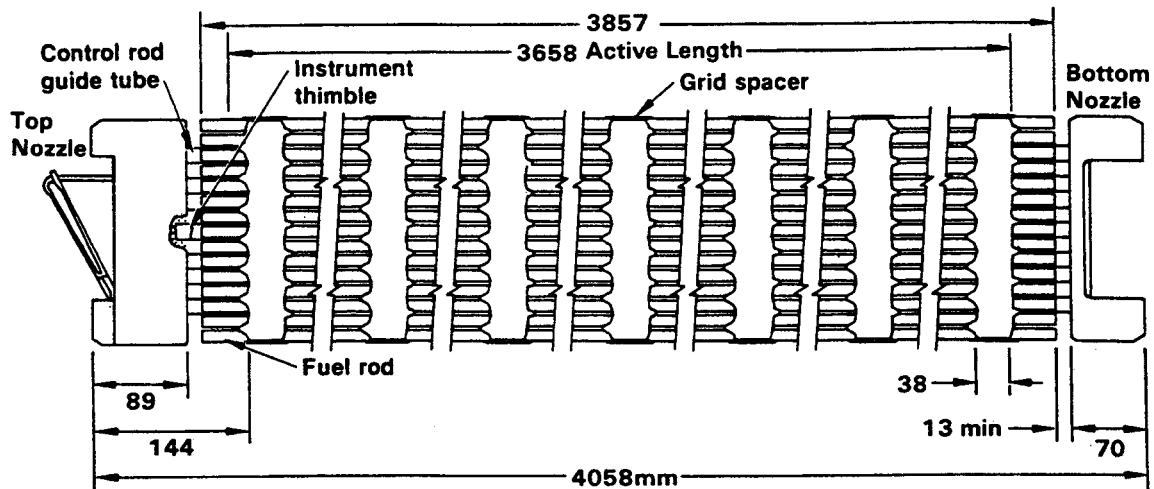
Surry 15 × 15 PWR Fuel Assembly T11, Serial number LM02JR.
